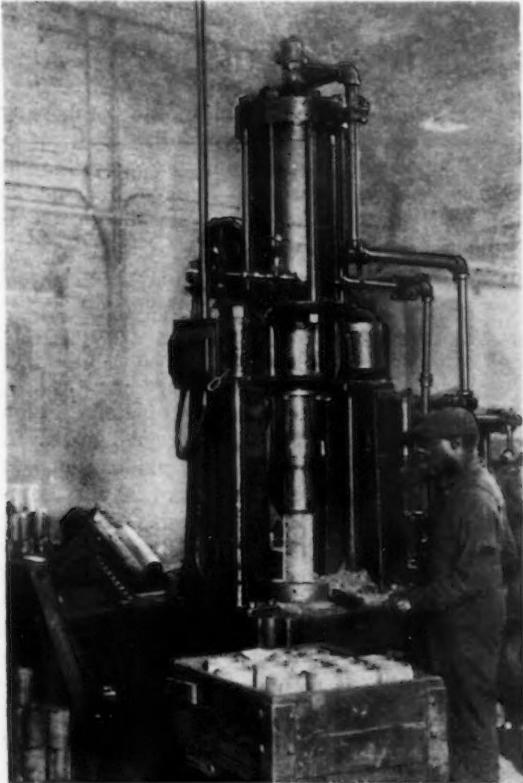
(Above)—Rough castings used for pulley hubs are forced through hardened steel rings having a cutting edge on the upper surfaces.
